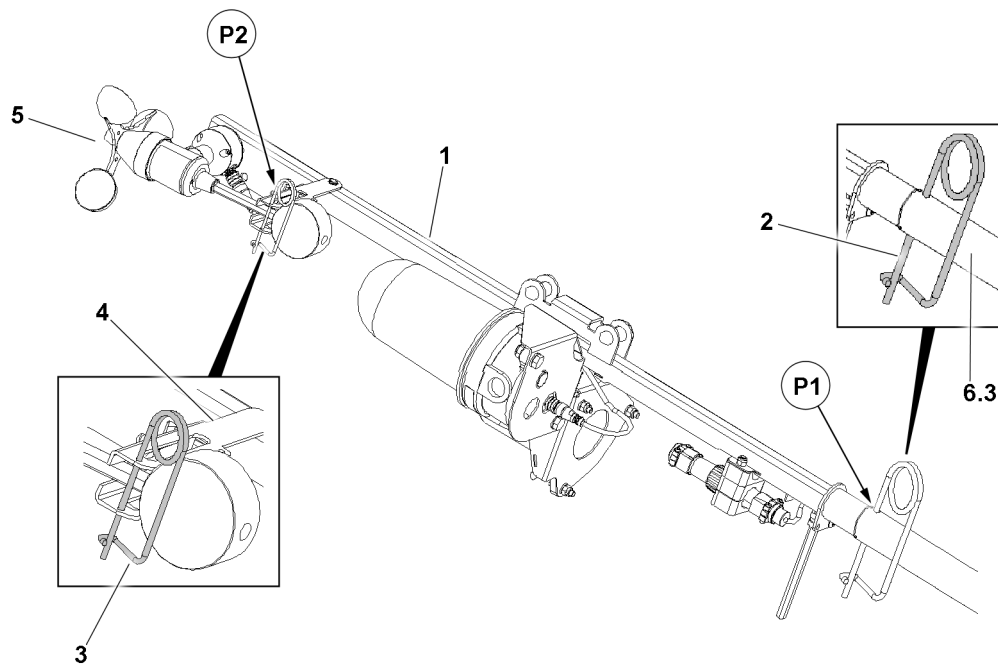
Assembling the wind speed sensor on the auxiliary boom
